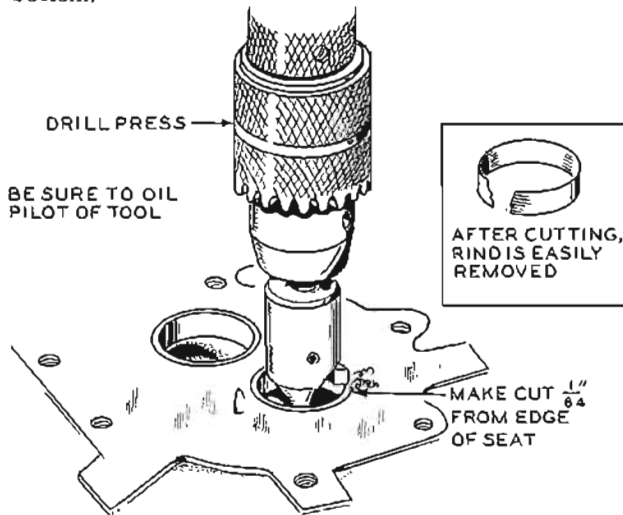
Cutting Out Valve Seat with Onan Tool (420B272)
